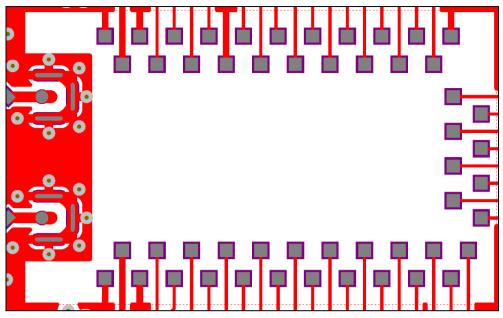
Exemplary base board footprint for 22M12 / 23M12 (top view)
